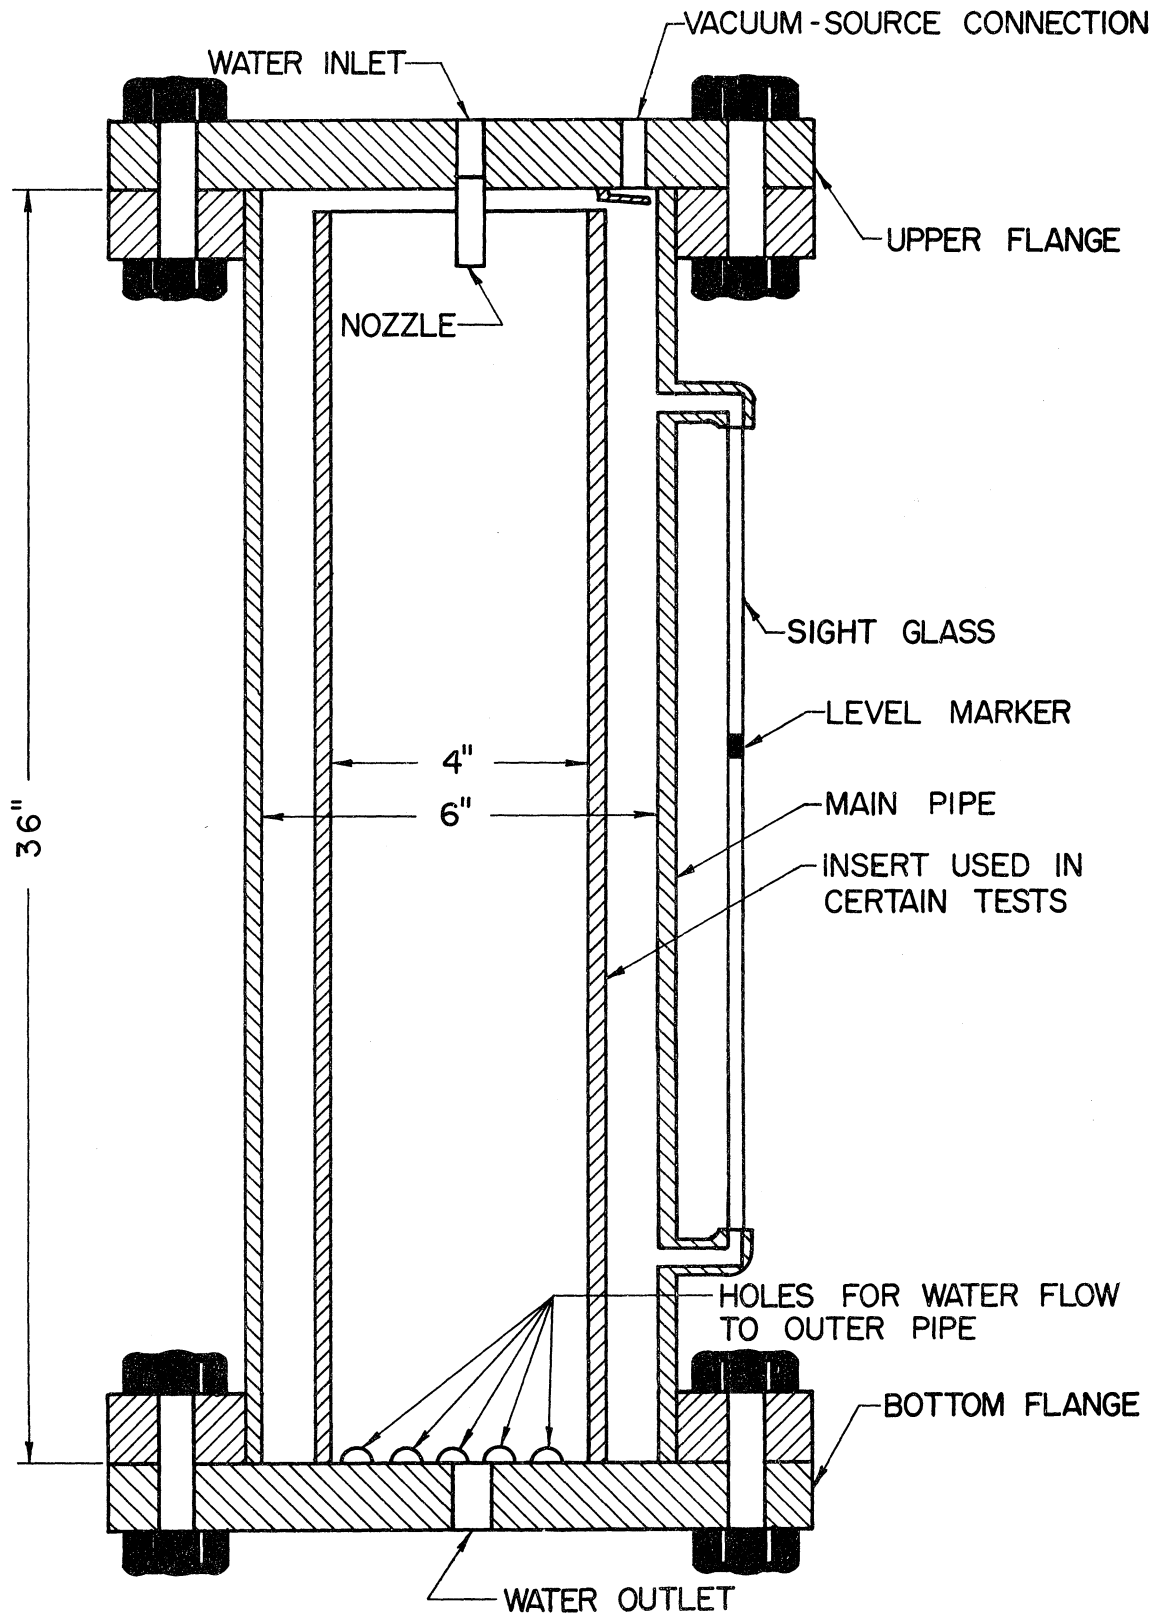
Cross-Sectional View of Main Body of Deaerating Unit.
